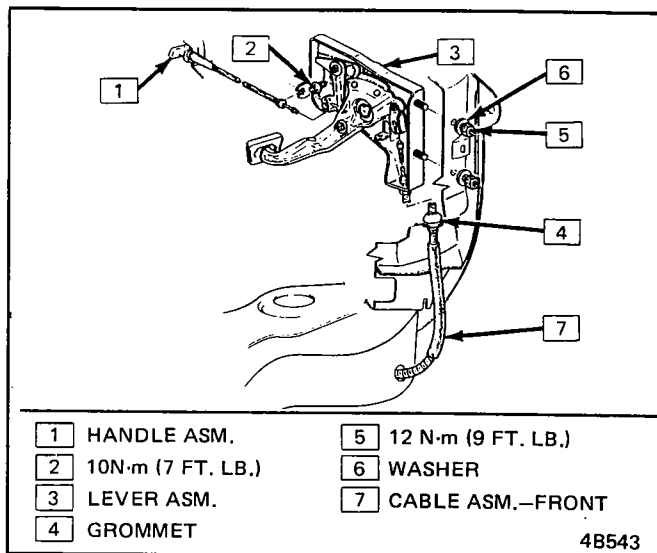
Parking Brake Release Handle & Control Assembly-B Carline
